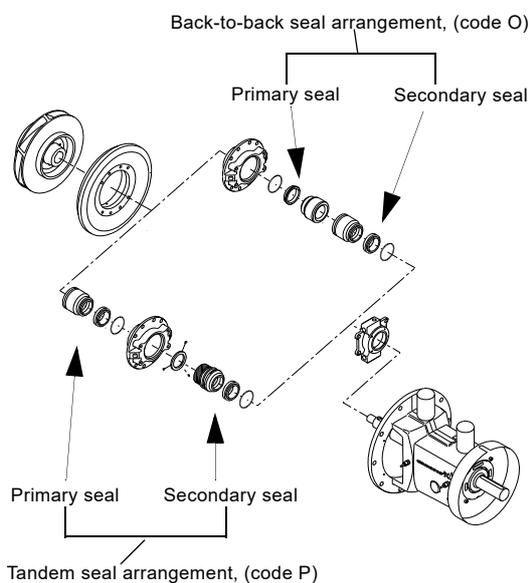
NKG pump with double-seal arrangements for a standard mechanical seals arranged in back-to-back or tandem.
